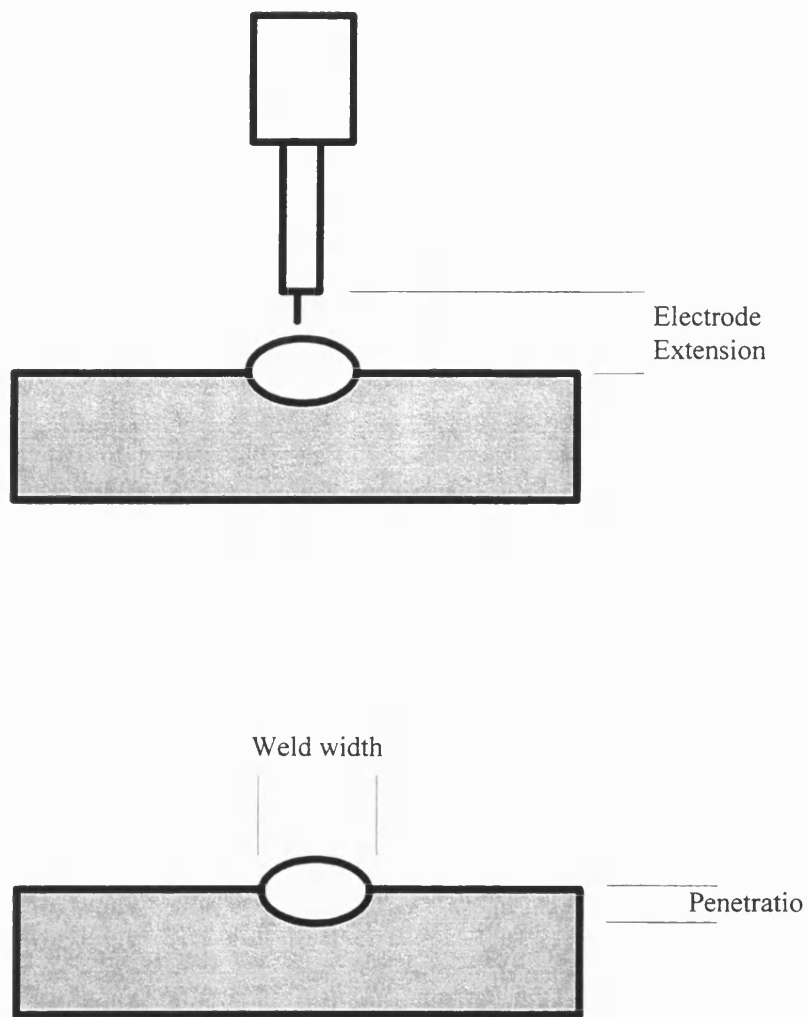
Electrode extension, weld width and penetration, relative to test piece
